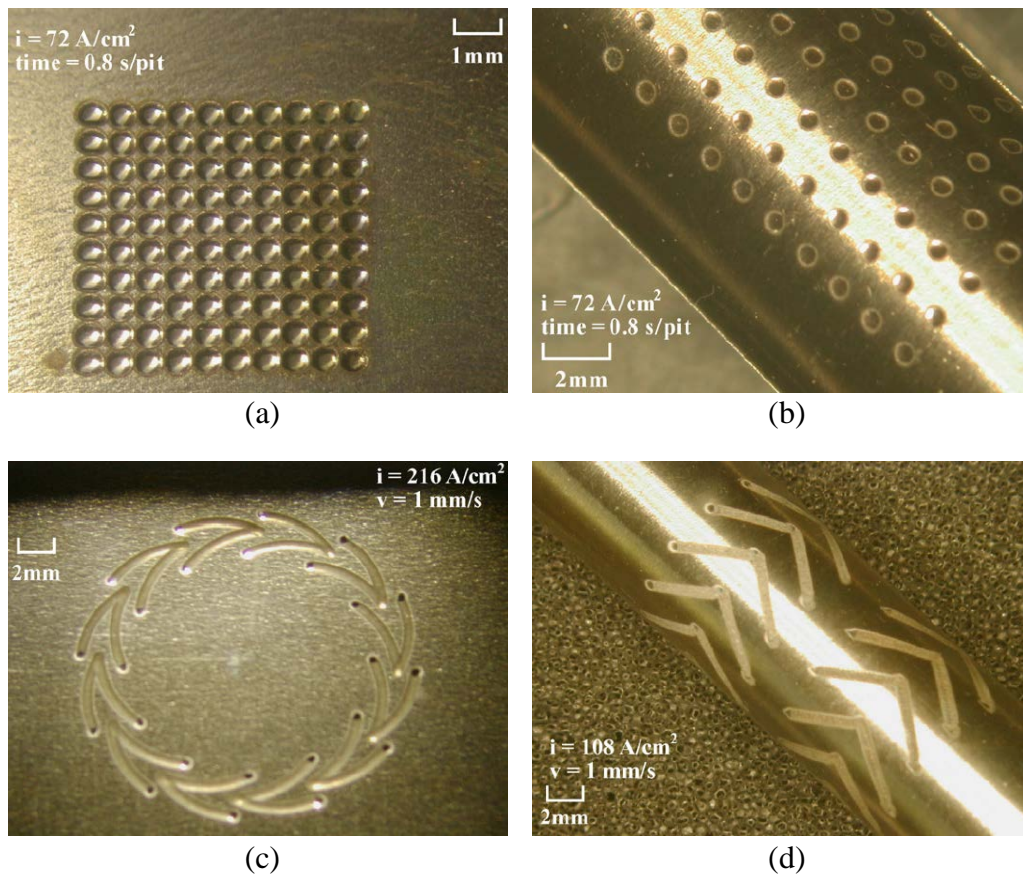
Complicated shapes machined by JECM, reprinted from [23].
